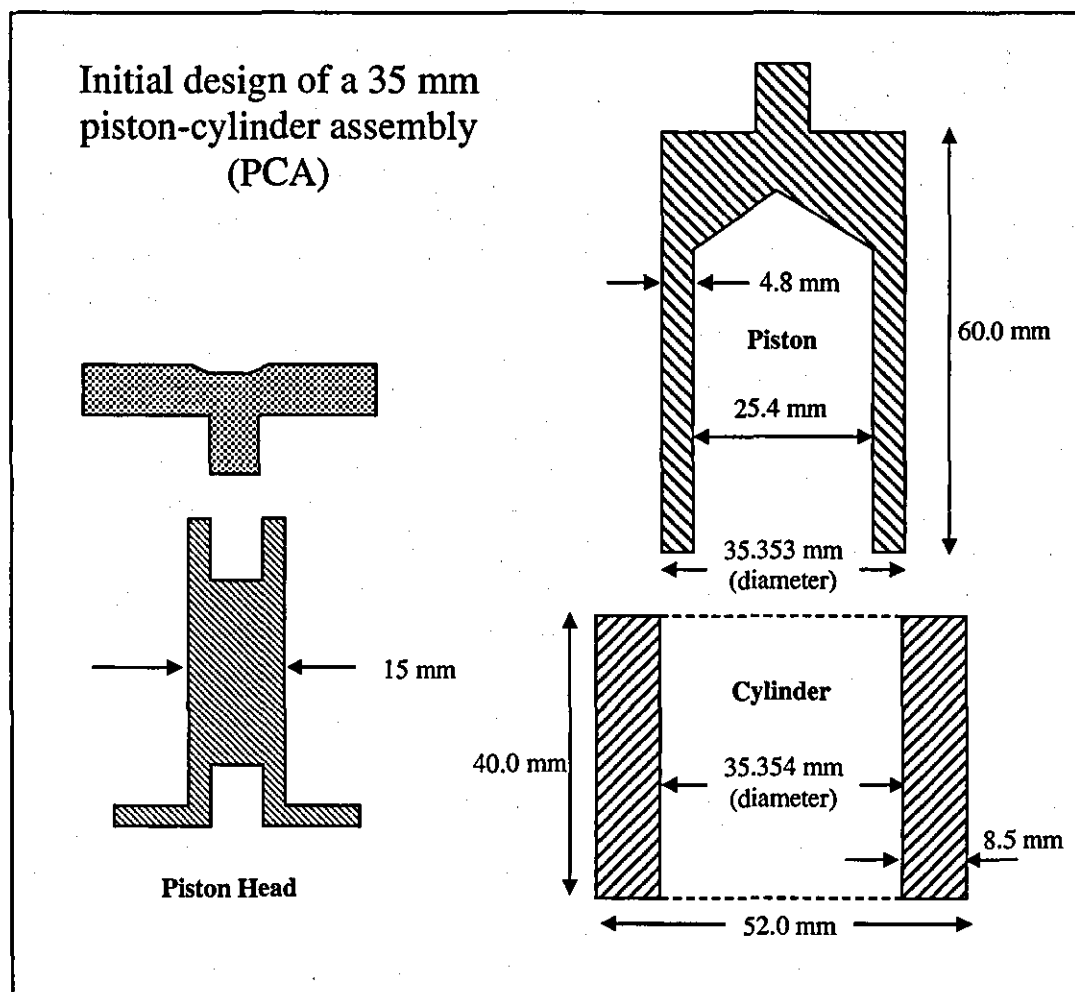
The initial design of a 35 mm piston-cylinder assembly
